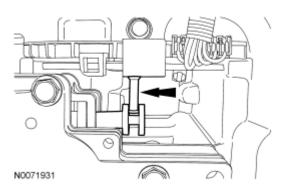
Identifying Crankshaft Dowel Pin At 11 O'clock Courtesy of FORD MOTOR CO.
